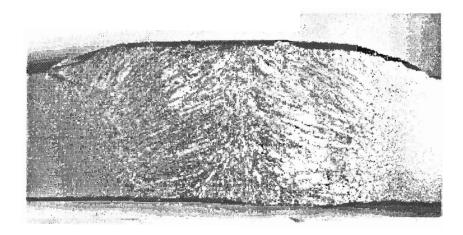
Macrophotograph of St3SY steel welded joint
